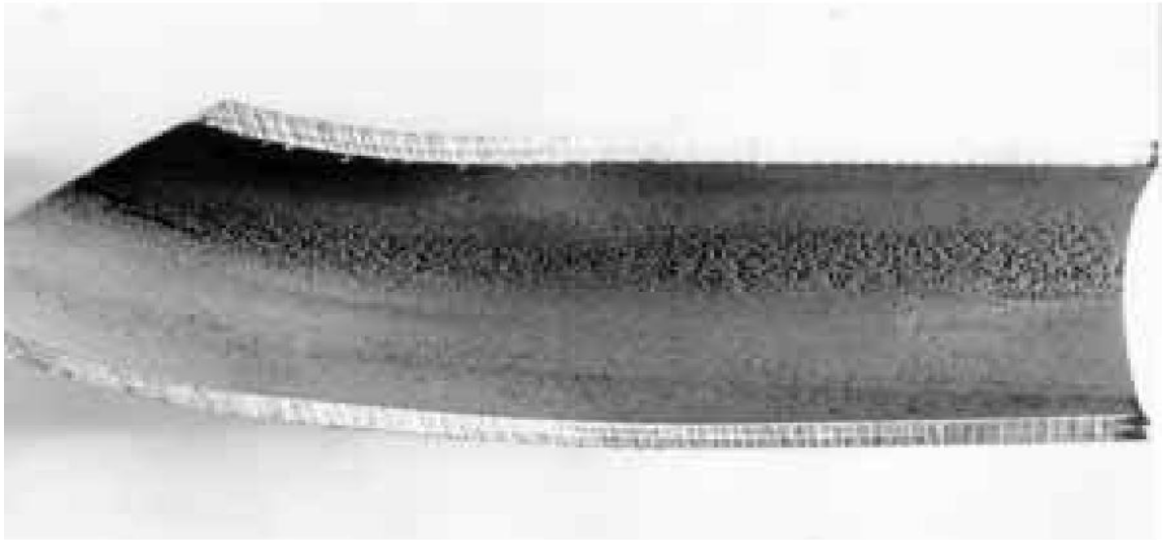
Internals of a superheater tube subjected to pitting corrosion [9]
